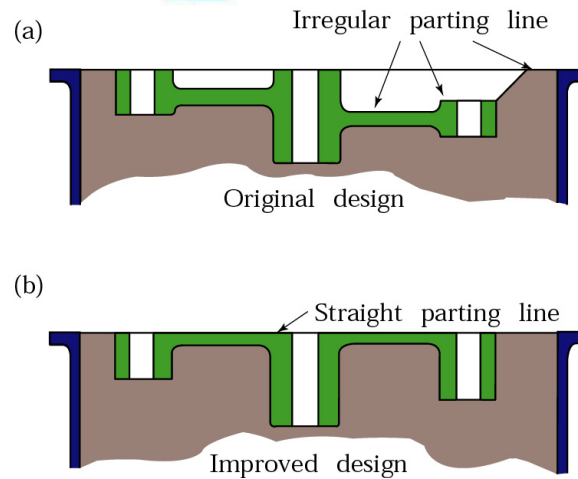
Designing for a straight parting line to reduce pattern and casting costs. (a) Irregular parting line is a costly design. (b) Straight parting line is less expensive.
